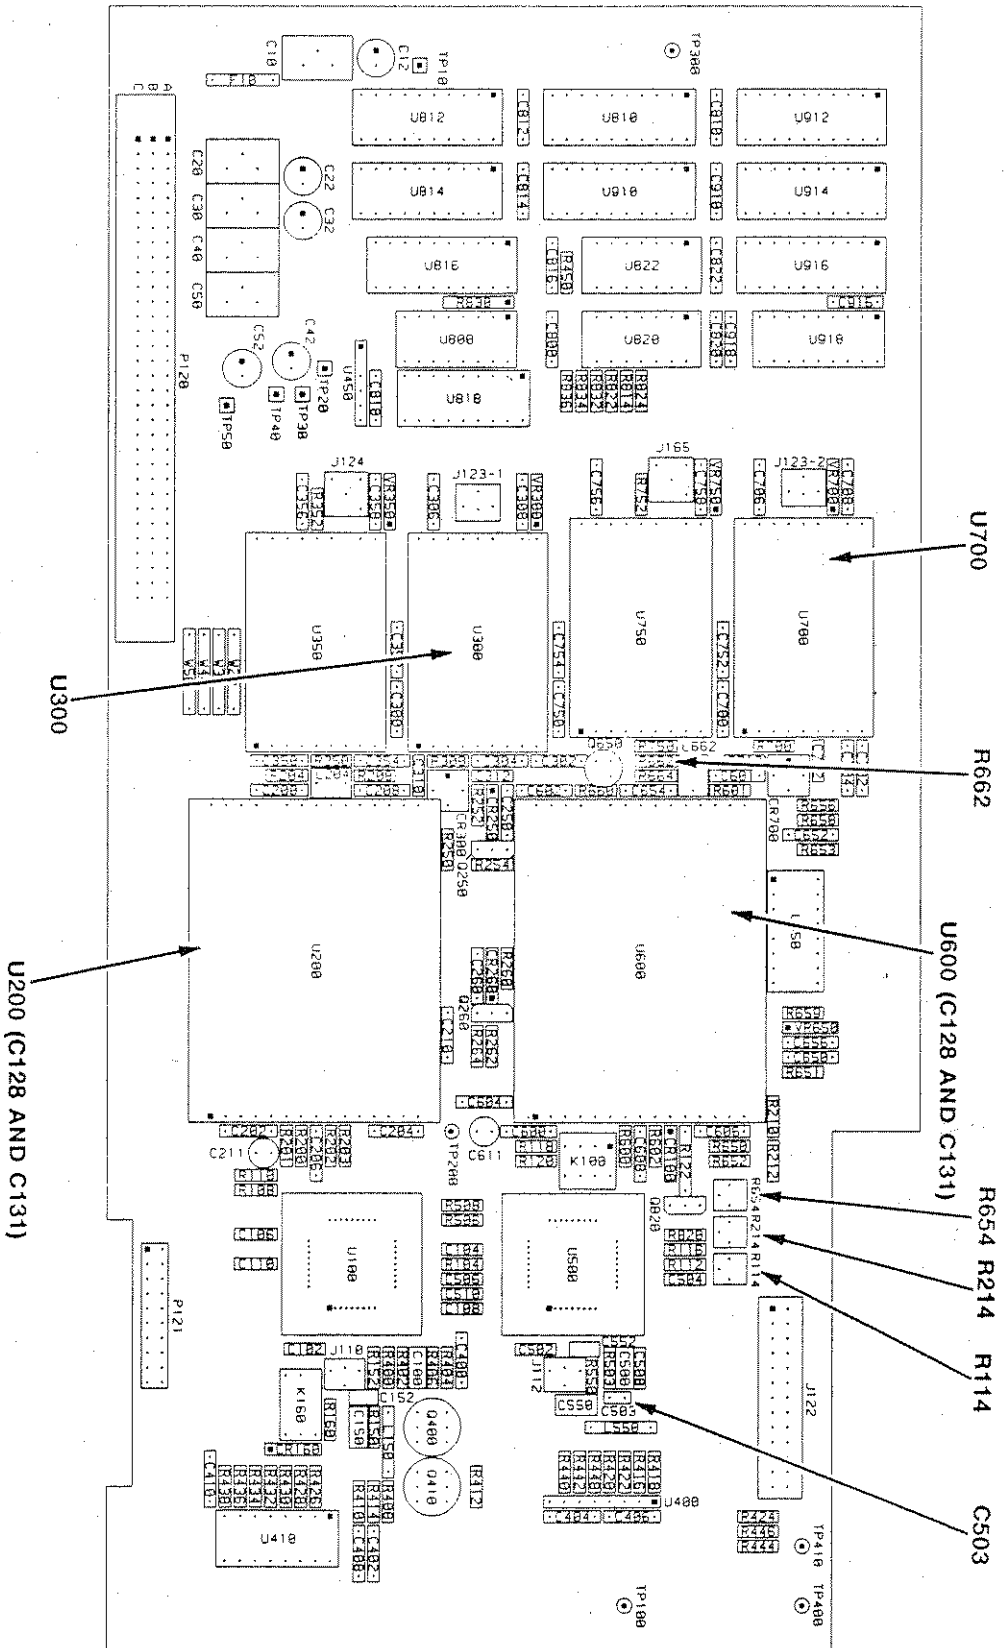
A12 - Input Amp Board Adjustment Locations
